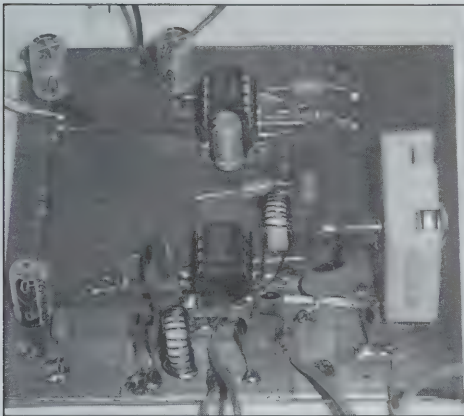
After the entire board is covered, solder the seams on the rear to join the pieces of copper tape.
